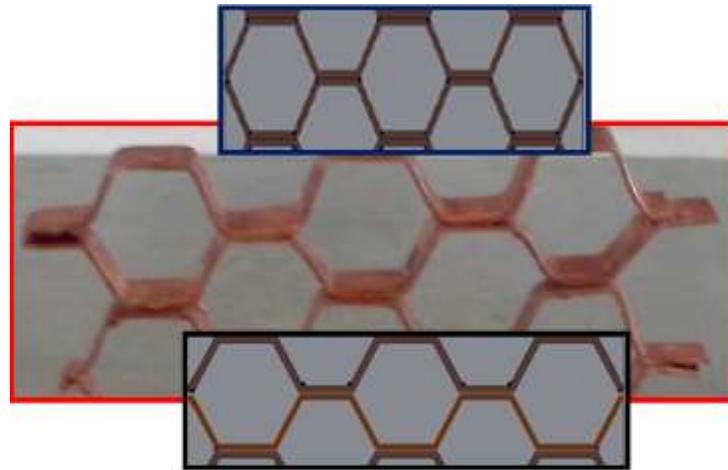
Copper honey comb structures with spot welded plates indicating dark locations.
